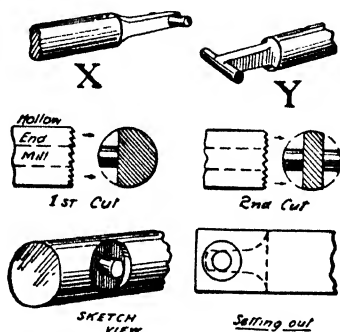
Method of Making Intermediate Valve Spindle with Solid Die Pin.
